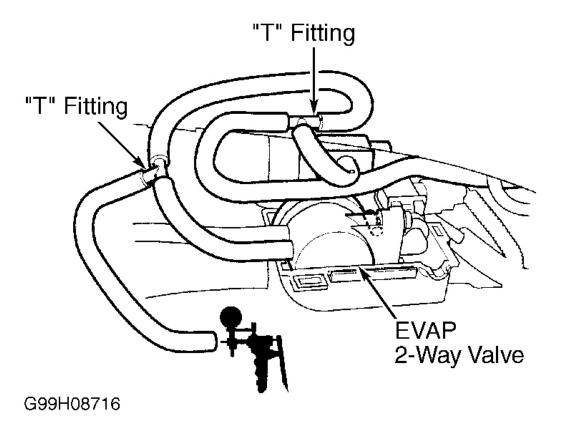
Connecting 2 "T" Fittings & Vacuum Pump To Hoses Courtesy of AMERICAN HONDA MOTOR CO., INC.
